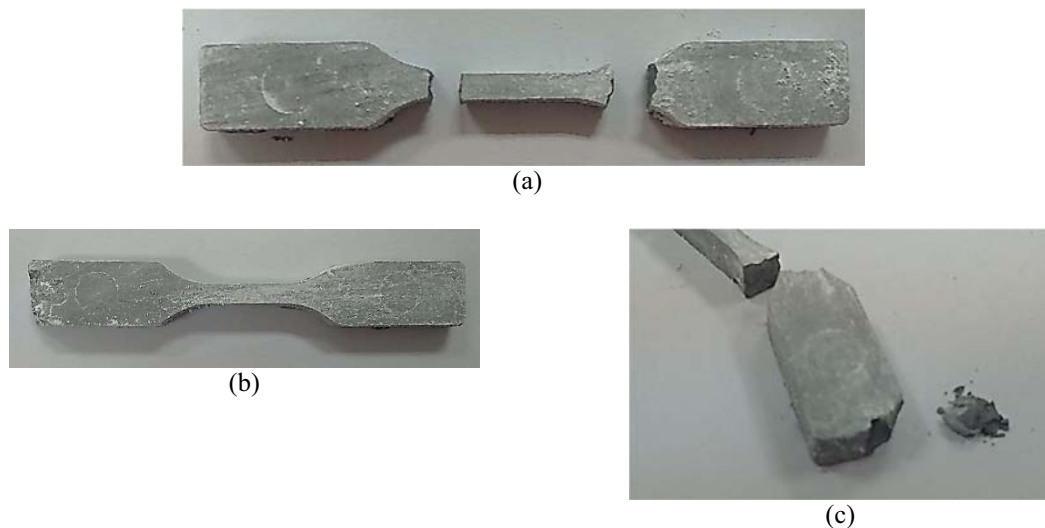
Defects observed on brown compact a) Fractures b) collapse c) cracks at conditions 70 °C and 4 hour.
